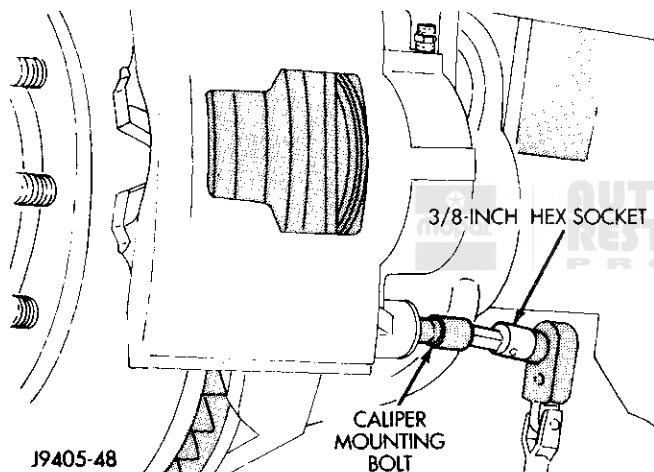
Caliper Mounting Bolt (3/4 and 1 Ton)
